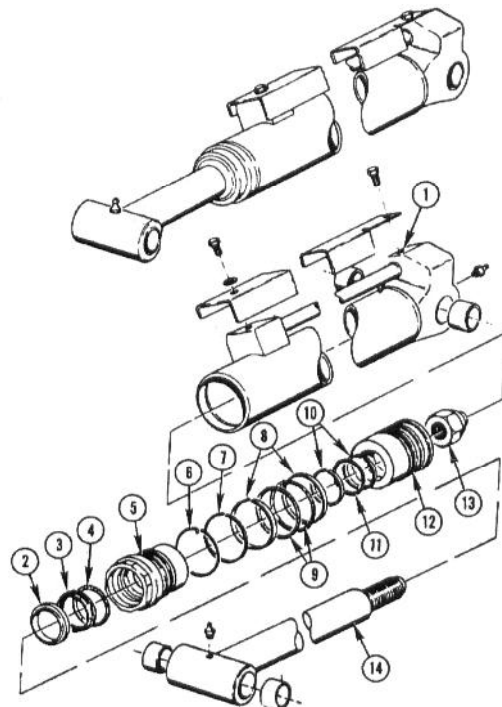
Identification of Parts Typical of MF Part No. 1605 013 M94
